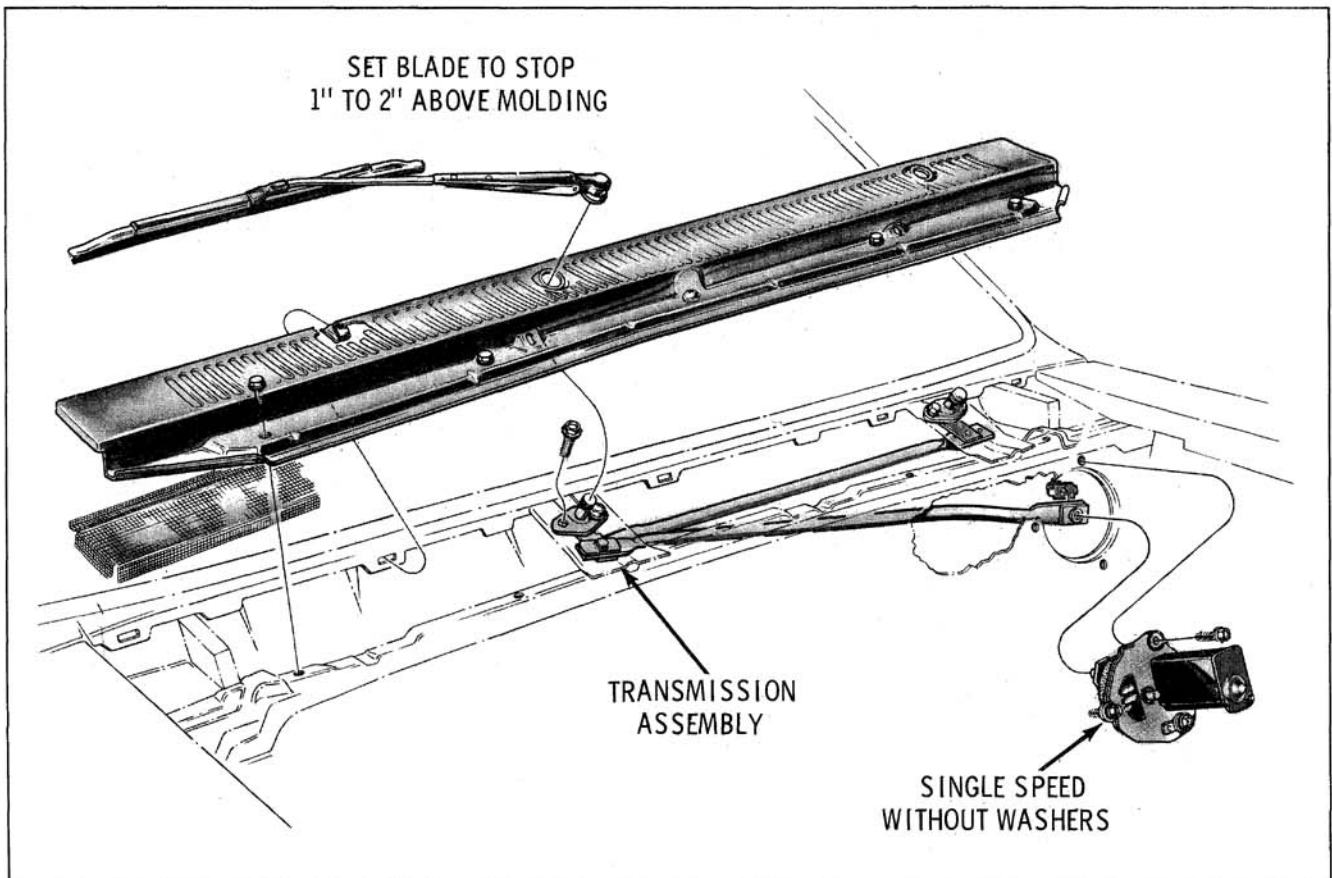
Wiper Mounting (33 thru 3800 Series)
